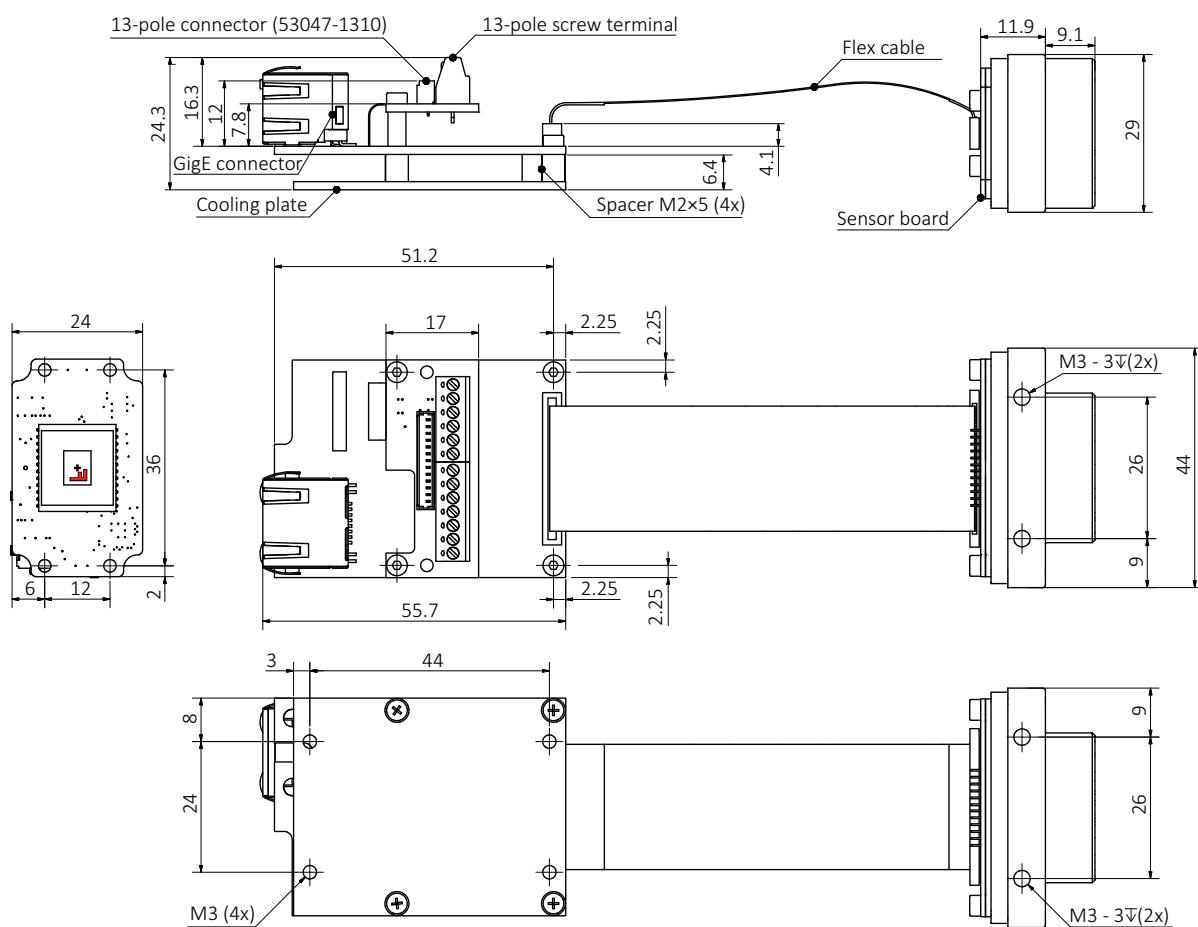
Manta type A board level with C-Mount (non-PoE models) dimensions
